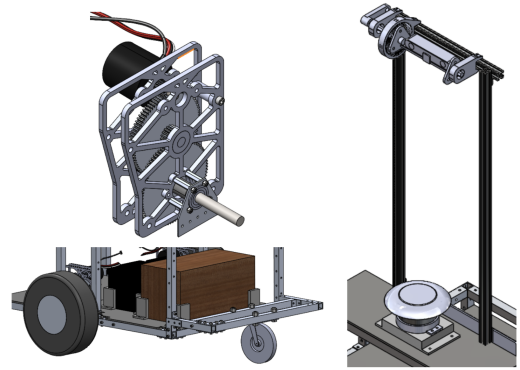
Top left: driving gearbox. Bottom left: powered and passive wheels. Right: elevated rotating camera mount
